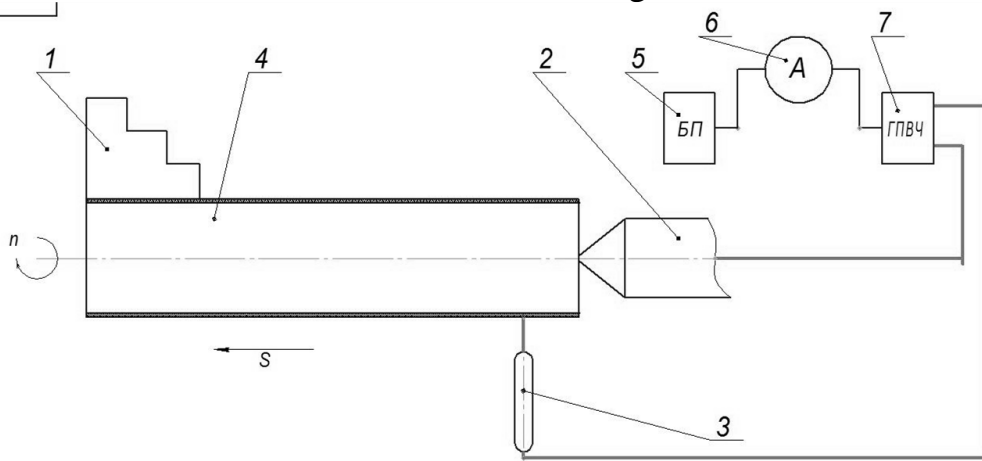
Scheme of experimental installation: 1 - carriage 3 cams; 2 - the center of the rear headstock of the machine; 3 - electrode; 4 - part $d = 52.5$ mm coated; 5 - power supply; 6 - ammeter; 7 - high frequency current generator; $n = 40$ rpm - speed;
